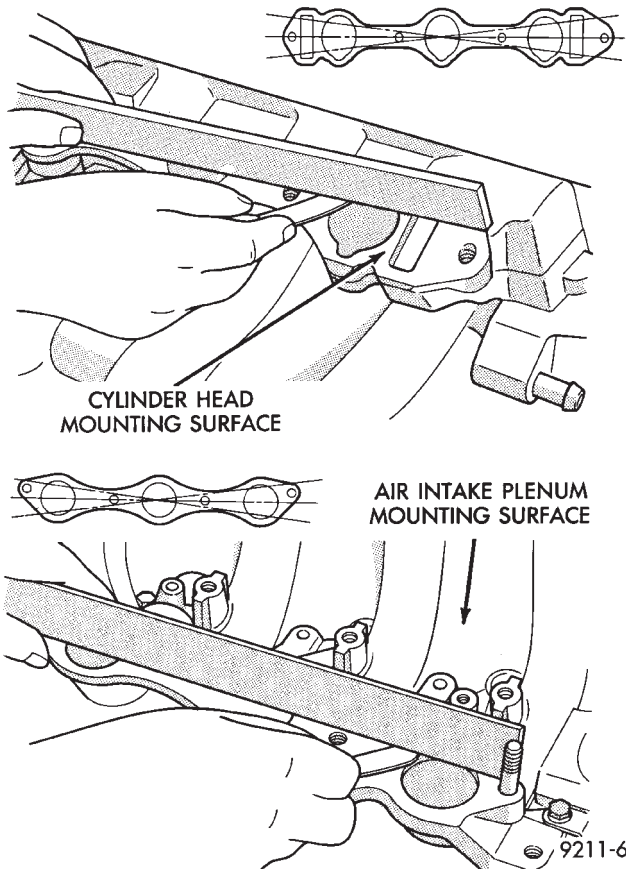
Check Intake (Cross) Manifold Mounting Surface
